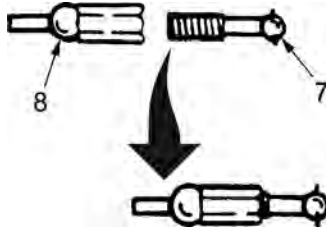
Inner and Outer Brake Adjust Links Assembly.
